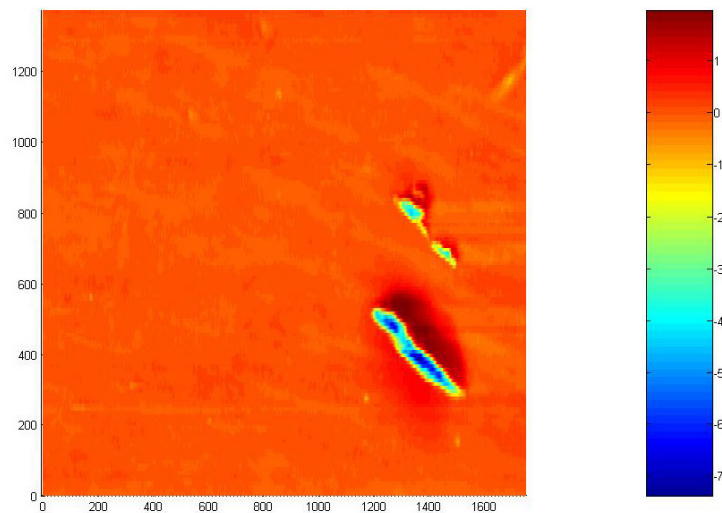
Specimen 1 measure 1, two dimensional surface representation, dimensions in μm .
